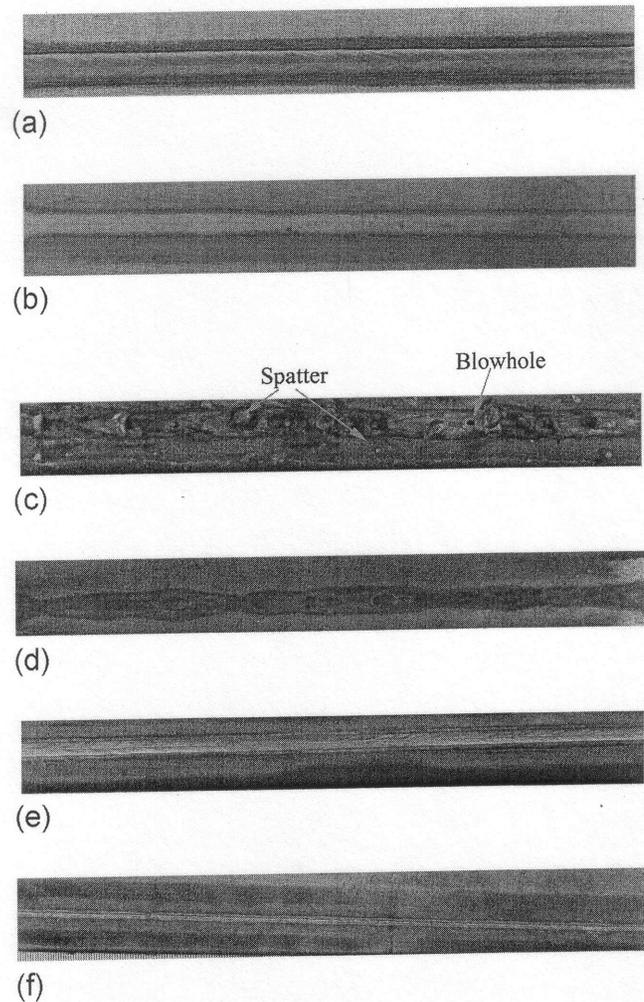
Top and back views of laser welds and laser/GTAW preheating welds. (a) Top view of laser weld without zinc at the interface, (b) back view of laser weld without zinc at the interface, (c) top view of laser weld with zinc at the interface, (d) back view of laser weld with zinc at the interface, (e) top view of laser/GTAW preheating weld, and (f) back view of laser/GTAW preheating welds [(a)–(d): laser power of 3000 W, welding speed of 1.8 m/min, the shielding gas flow rate of 30 CFH; (e)–(f): laser power of 3000 W, welding speed of 1.8 m/min and arc current of 200 A; the shielding gas flow rate of 30 CFH].
